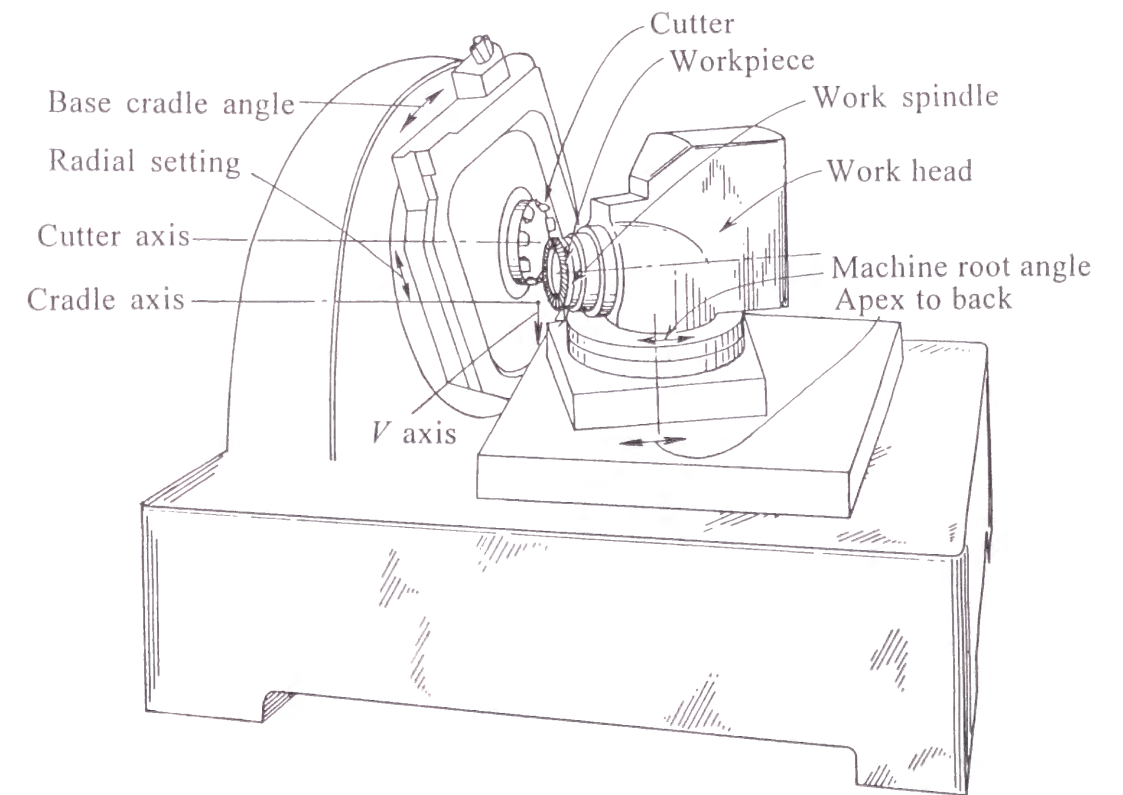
Karatsu hypoid and spiral bevel gear generating machine
